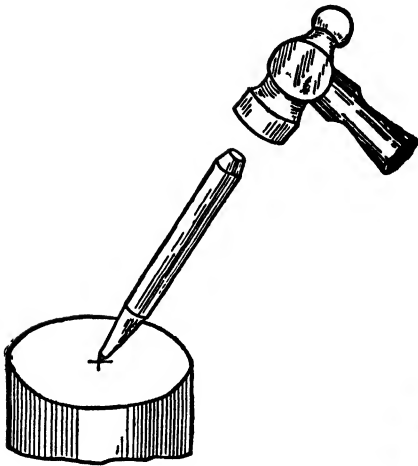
If the center-punch mark is not accurately located, move it by driving the center punch at an angle. (South Bend Lathe Works)
